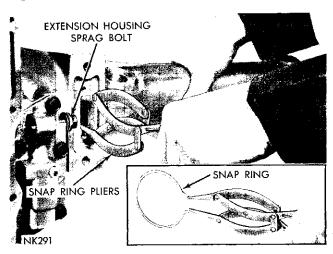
Removing or Installing Extension Housing (Chrysler Models)
